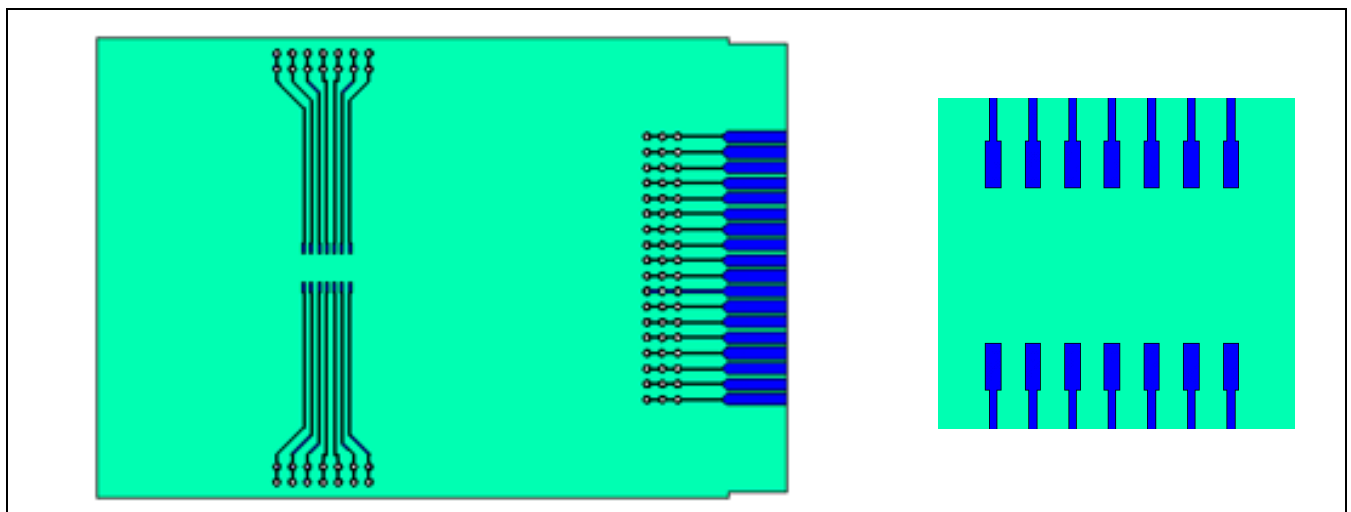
PCB reference layout (according to JEDEC 1s0P)
